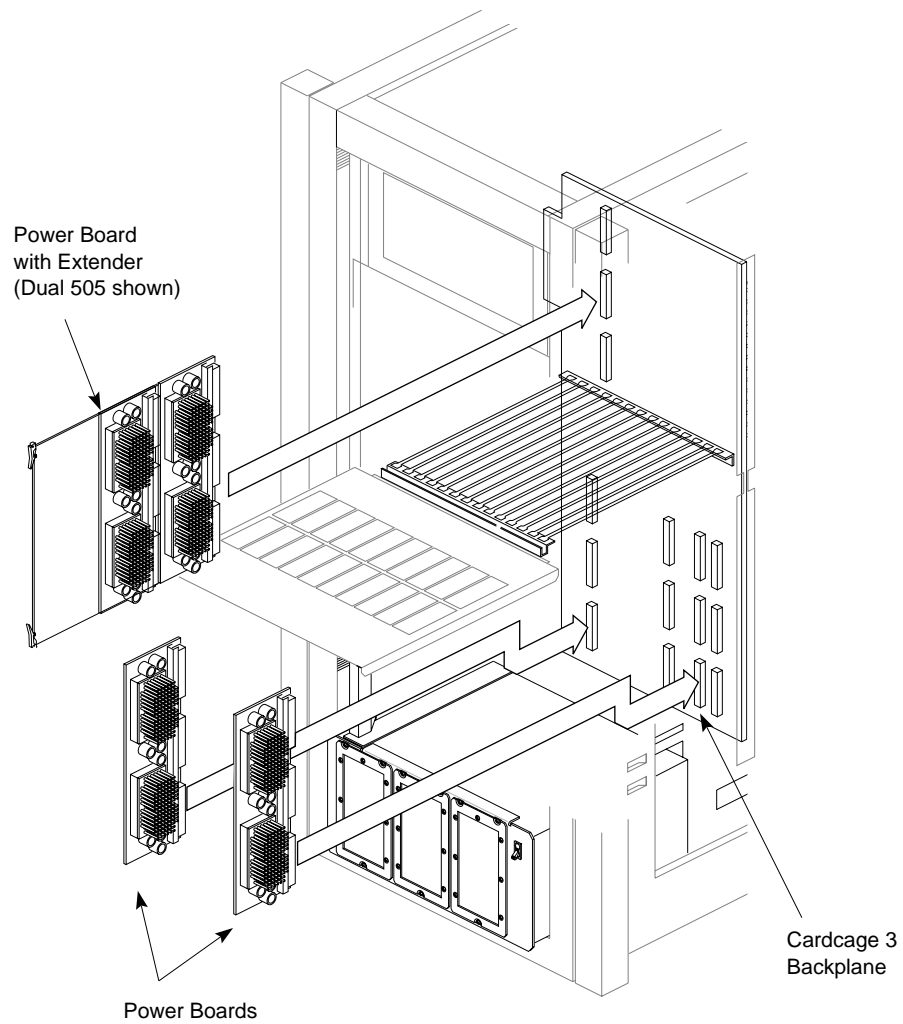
Power Board Locations Cardcage 1 and Cardcage 3
